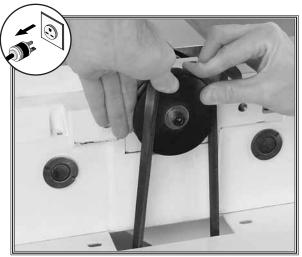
Rolling the V-belt onto the cutterhead pulley.
